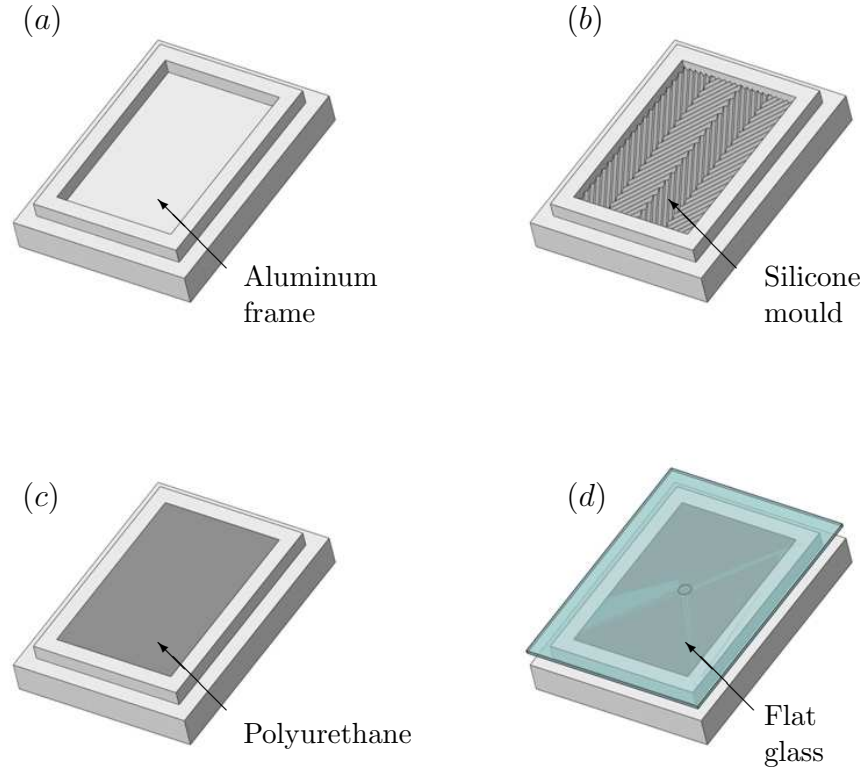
Casting methods: (a) aluminum frame, (b) silicone rubber mould applied inside aluminum frame, (c) polyurethane plastic is poured onto the mould, (d) flat glass pressing the casting mix and mould
